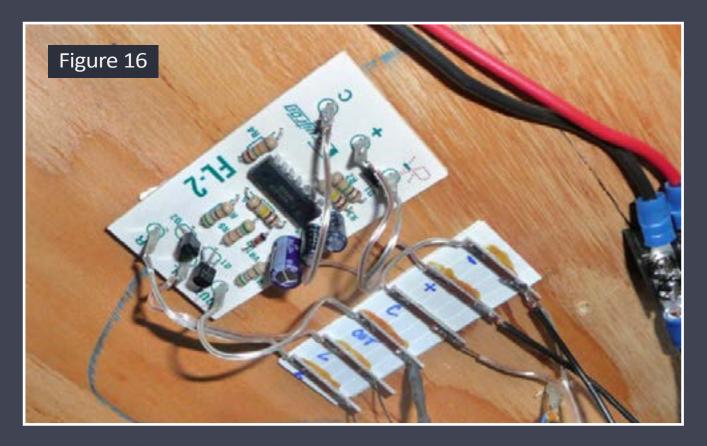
To install the flasher module underneath the layout, I first assembled a simple terminal strip using six 1" lengths of PC tie strips spaced evenly and glued to a ¾" x 3" section of .040" sheet styrene. I tinned both ends of each strip and soldered six lengths of braided stereo hookup wire from the spade lugs on the FL-2 to the ties on my terminal strip. I marked the terminal strip to show which tie matches which lug on the FL-2 (+, -, Out, C, L, R). Then I applied double-sided foam tape to the backs of the terminal strip and the FL-2 and pressed them up against the underside of my layout.
